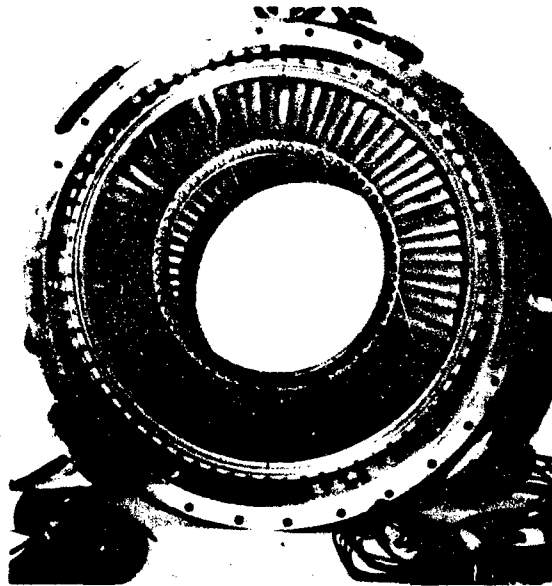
Build I, Full Rear View of Second Nozzle Assembly (XPN-18128)
